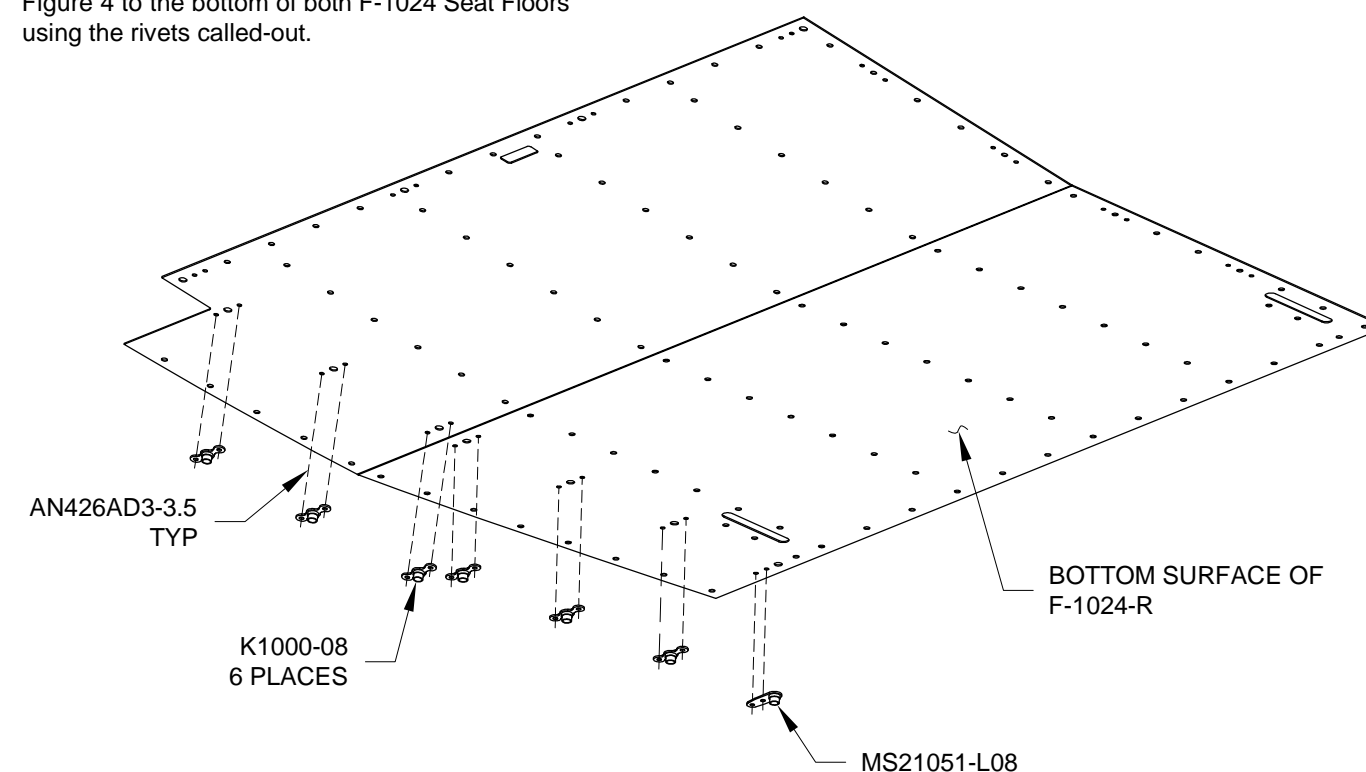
RIVETING NUTPLATES TO THE SEAT FLOORS
